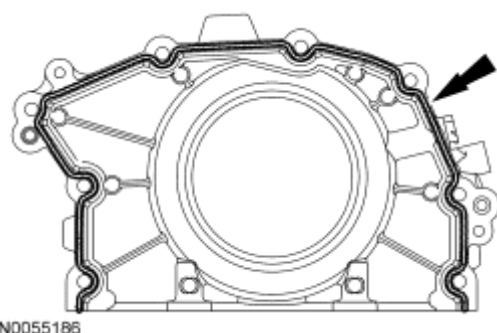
Applying Bead Of Motorcraft High Performance Engine RTV Silicone To Sealing Surface Of Crankshaft Rear Seal Retainer
